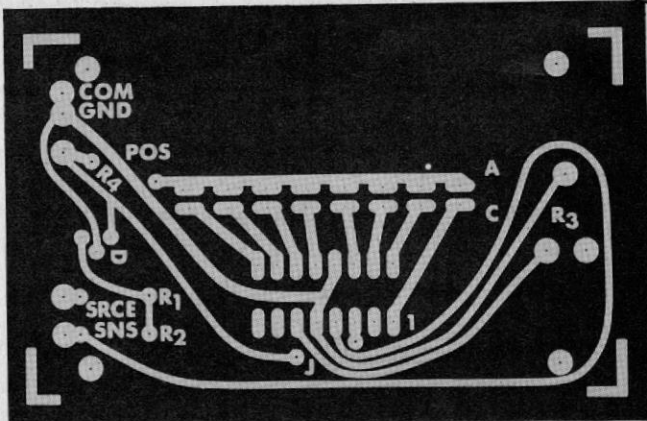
Same-size etching and drilling guide for pc board is at top. Component placement directly above.
